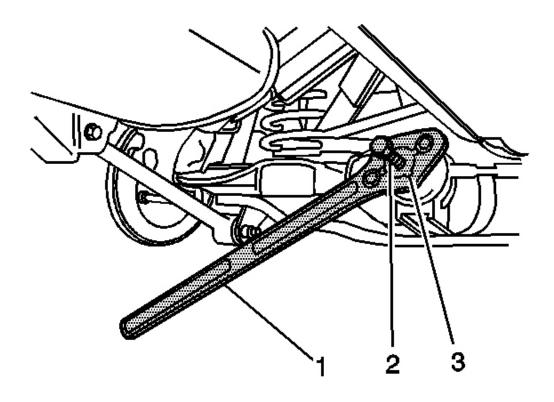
Using J 8614-3, J 8614-2 & J 8614-01 Courtesy of GENERAL MOTORS CORP.
